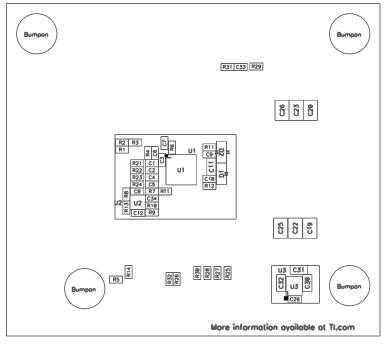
TPS51727EVM Bottom Assembly Drawing, Bottom View
